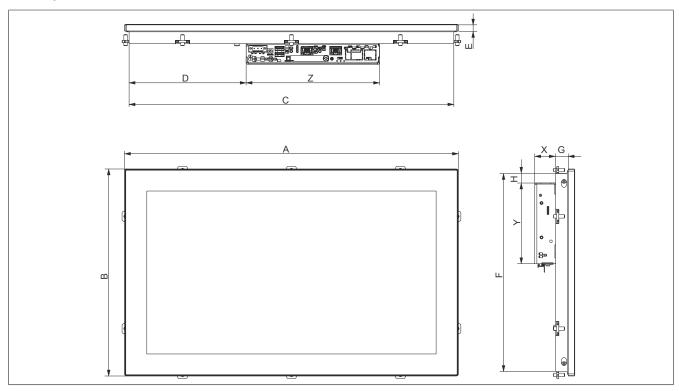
Panel PC 2200 with AP9x3 panels - Dimensions
